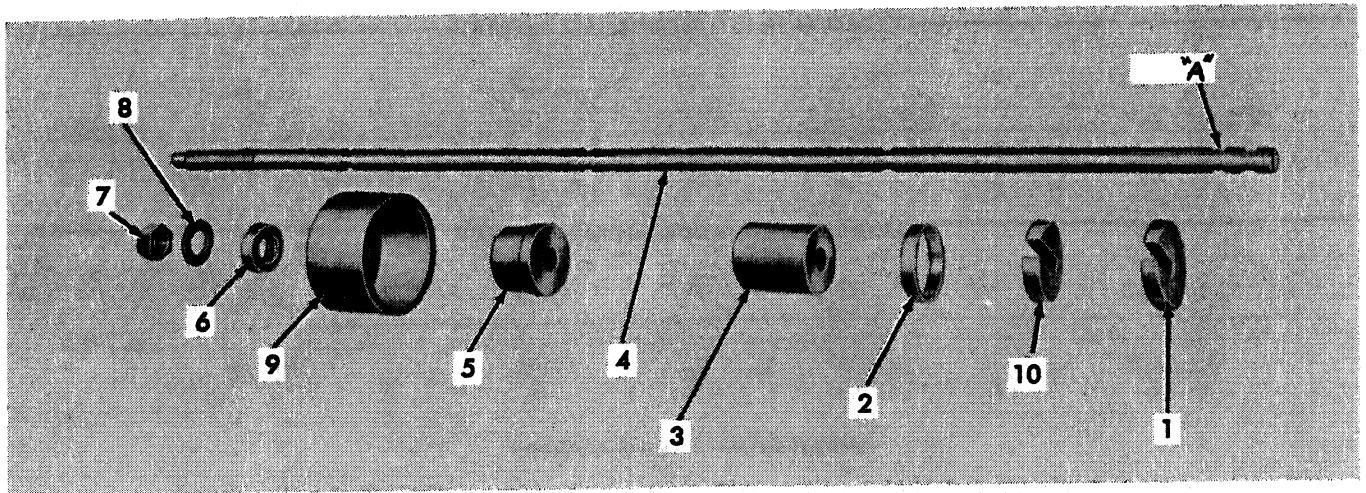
Camshaft Bearing Removing and Installing Tool Set (T-20252)
